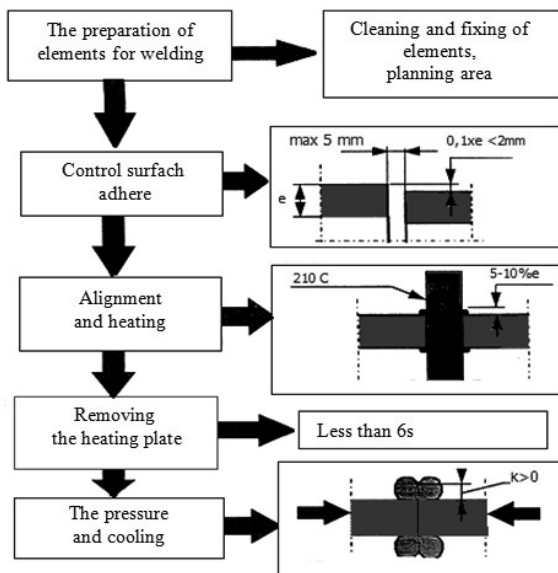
Stages of the frontal hot welding process [2]
